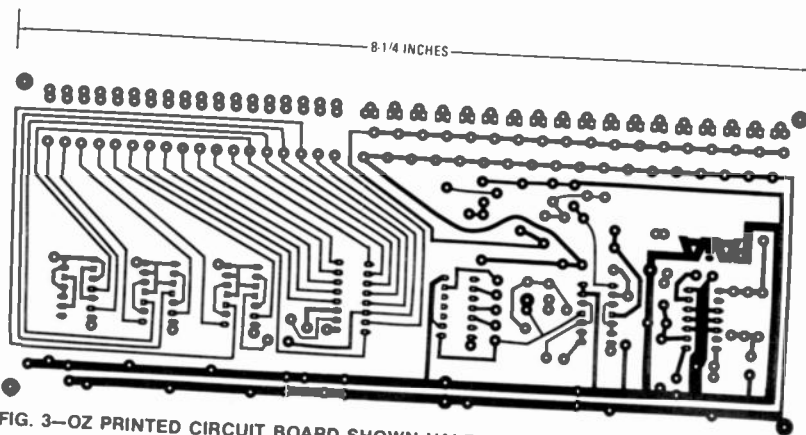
OZ PRINTED CIRCUIT BOARD SHOWN HALF-SIZE.
